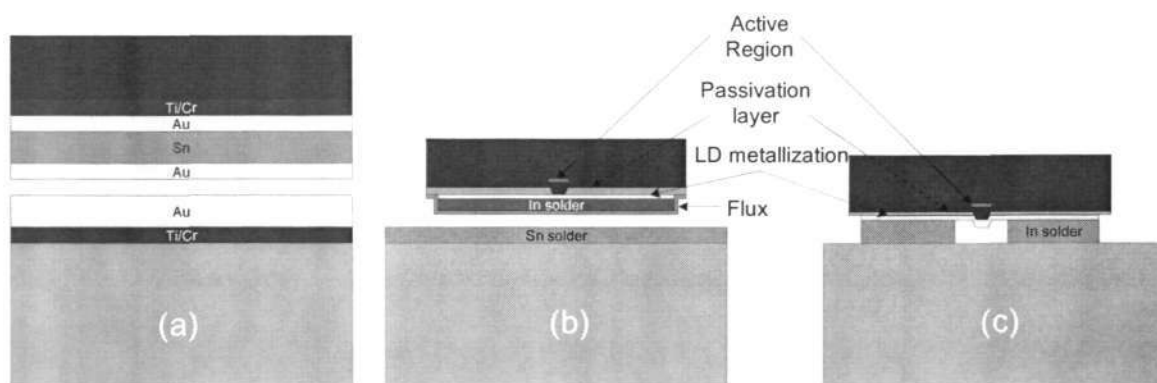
Schematic diagram of various bonding techniques. (a) Lee et al. composite structure for Au-Sn solder joint; (b) Merritt et al. approach using In-Sn solder joint; (c) Boudreau et al. bridged bonding using In solder.
